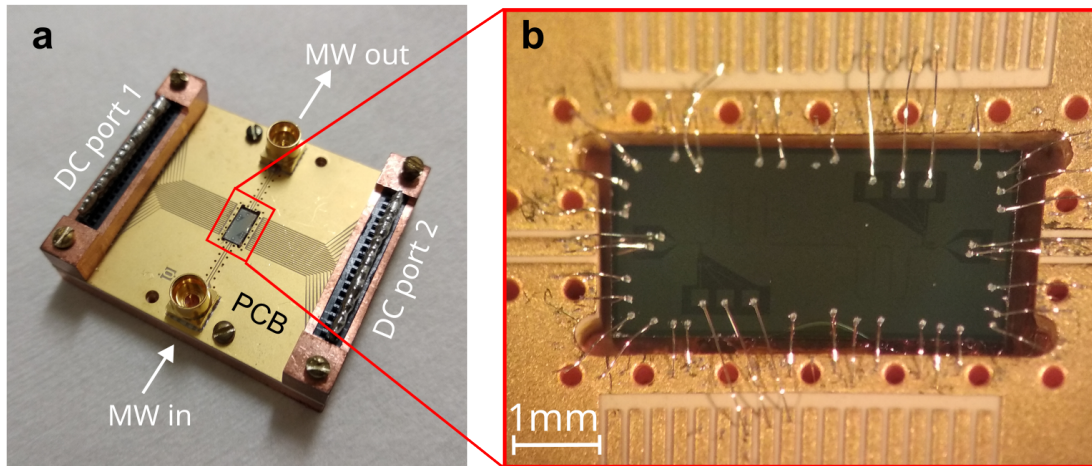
Photos of the sample chip on a PCB after wire bonding. (a) The PCB photo with sample chip at the center, consisting of  $2 \times 18$  pins DC ports and 2 microwave ports. (b) Image from optical microscope showing the aluminum bonding wires connecting the pads on the sample to the gold pads on the PCB.
